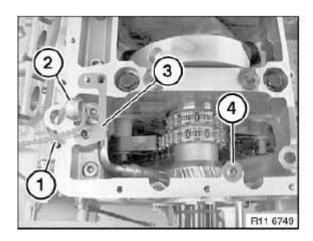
Identifying VANOS High-Pressure Line, Spacer Plate And Spacer Courtesy of BMW OF NORTH AMERICA, INC.
